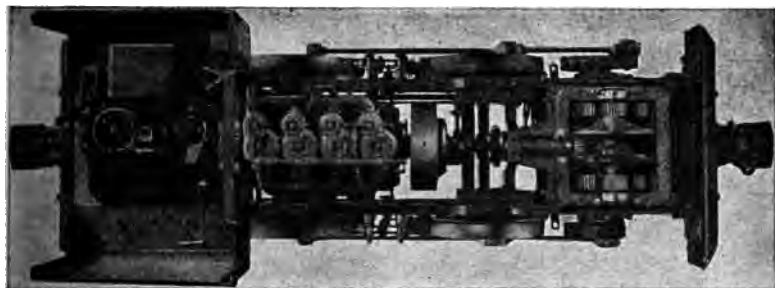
Plan View of Baldwin Gasoline Locomotive, Showing Arrangement of Parts
